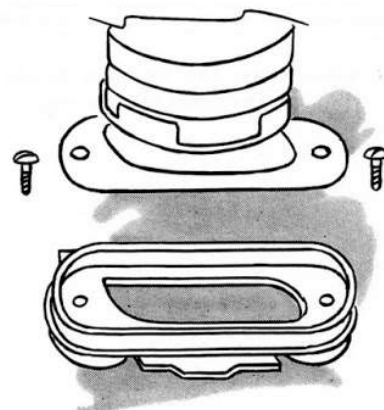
Bag ring and muffler assembly, Model 60 cloth bag
